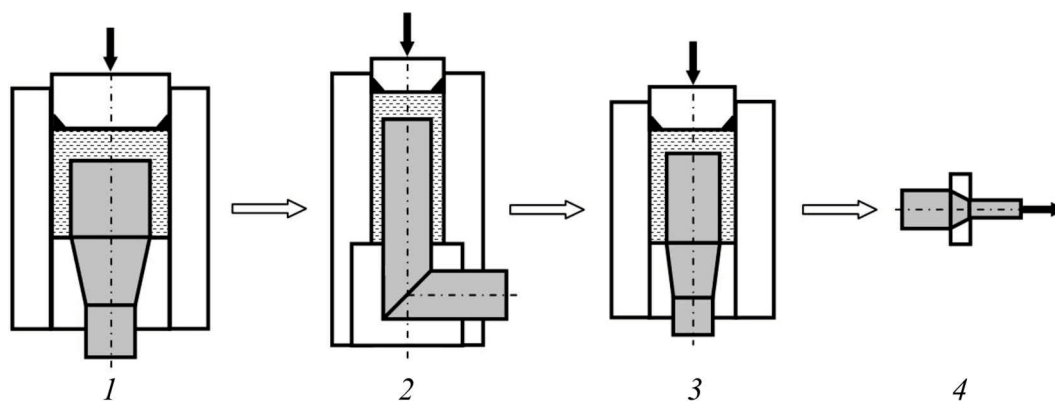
A new combined technology including the HE (1, 3), ECAH (2) and D (4) techniques for making wire
